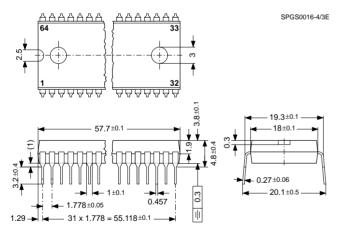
64-Pin Plastic Shrink Dual Inline Package (PSDIP64) Weight approximately 9.0 g Dimensions in mm
